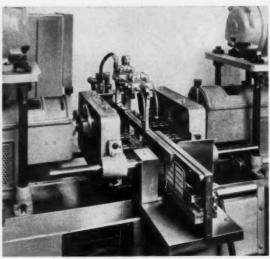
Close-up of Ettco-Emrick tapping machine shown in Fig. 1
